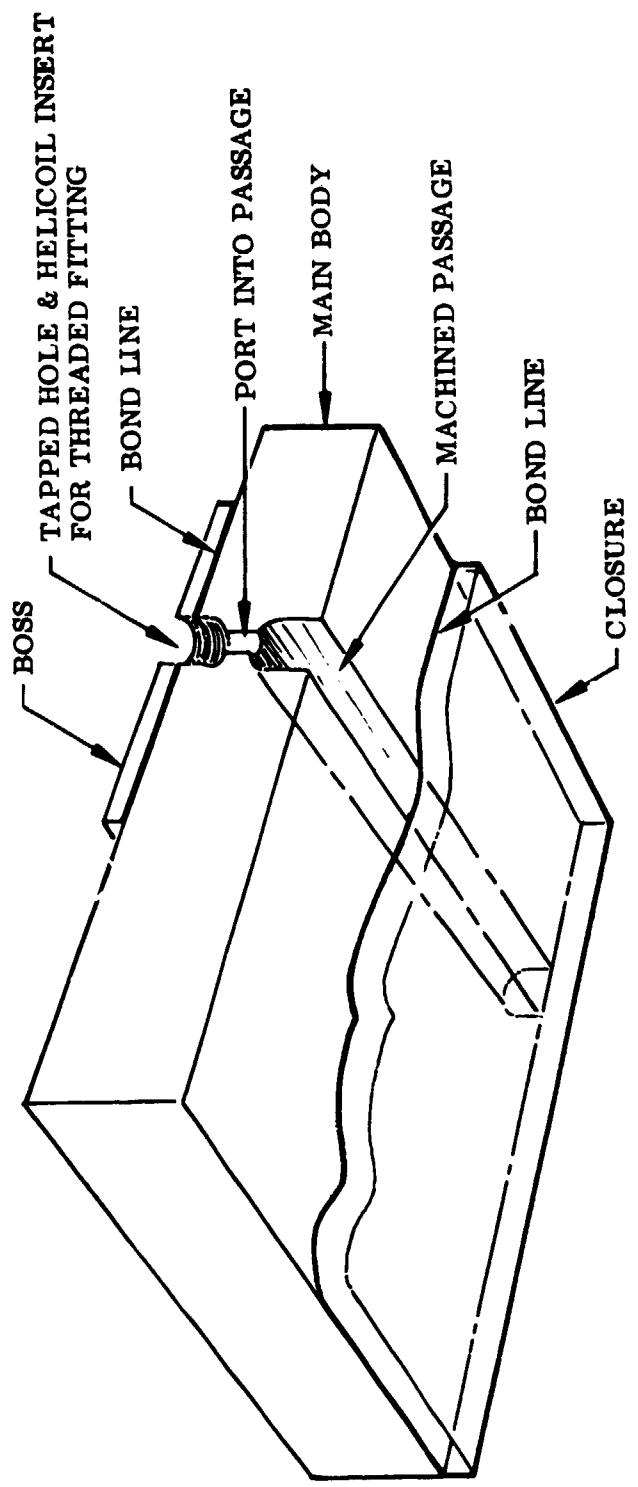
TYPICAL BASEPLATE CONSTRUCTION
